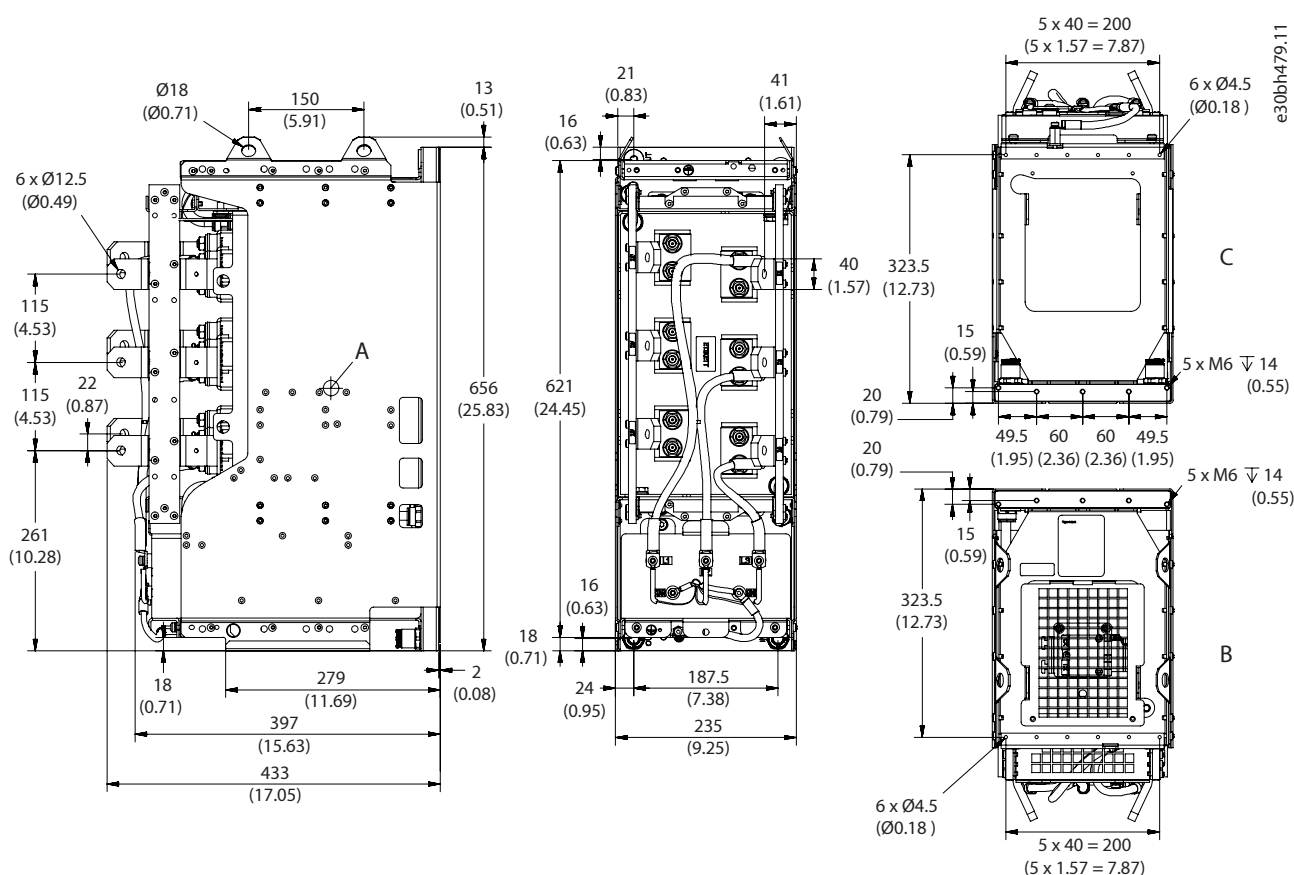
Dimensions of the LC Filter Size 12, in mm (in)
